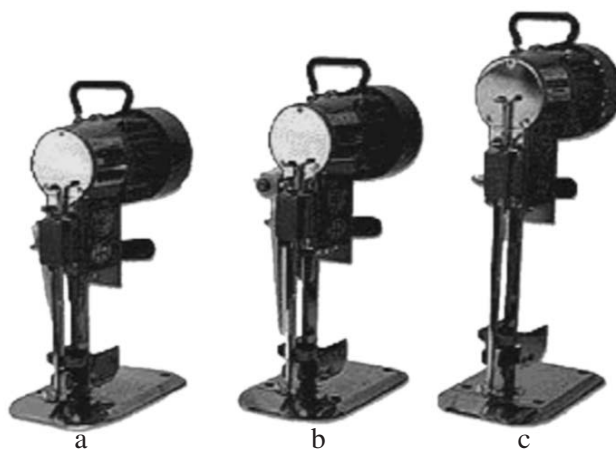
Vertical cutting machines using blades with the following cutting edge lengths: a – 150 mm, b – 200 mm, and c – 250 mm.
